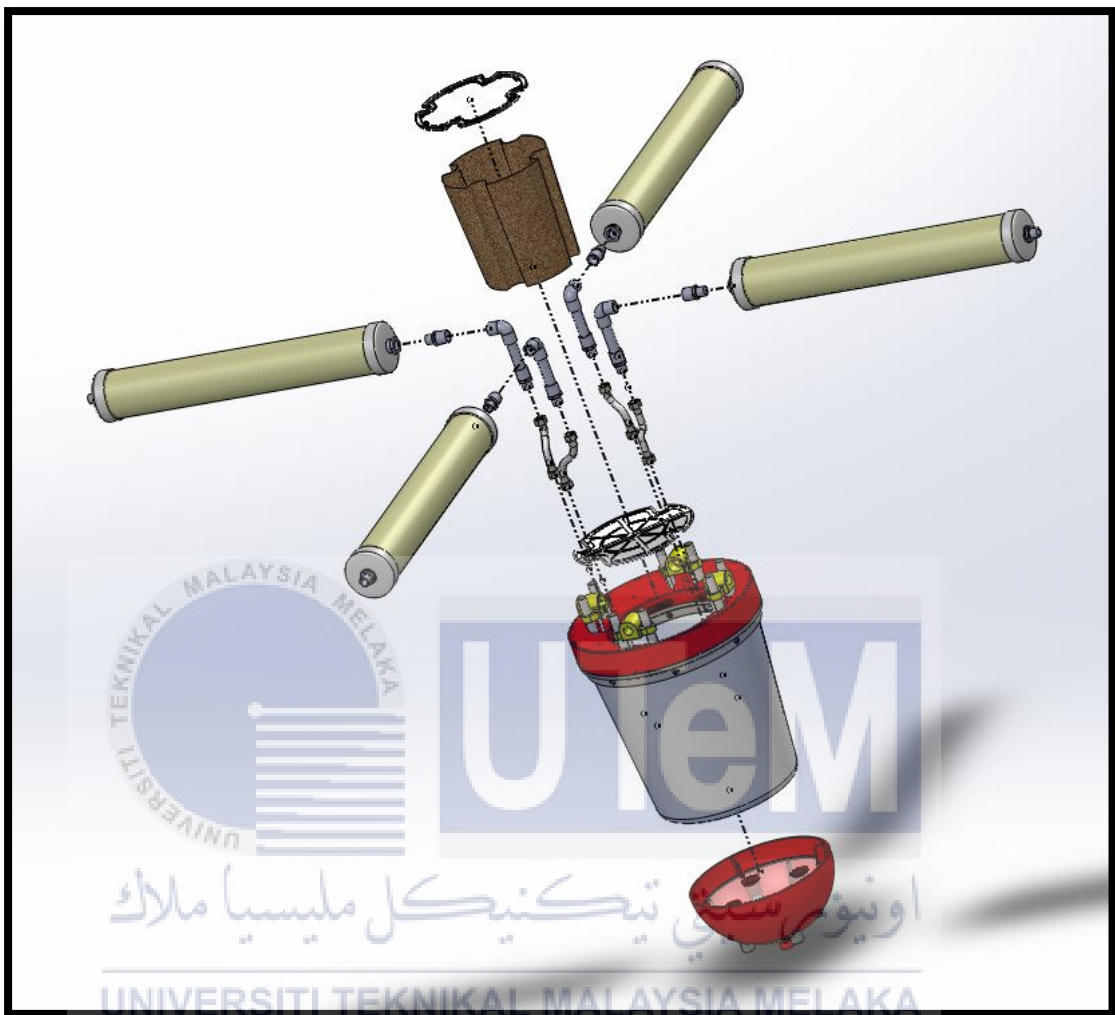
Main Assembly of River Trash Collector System (RTCS)
